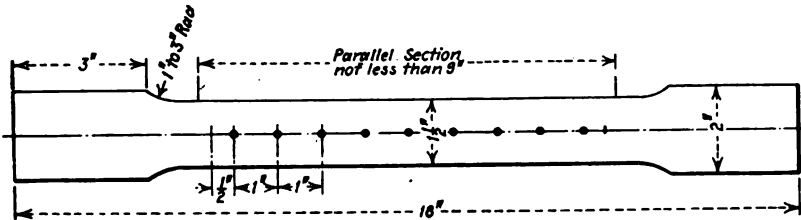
STANDARD FORM OF TEST SPECIMEN REQUIRED FOR ALL TENSION TESTS OF PLATE MATERIAL
